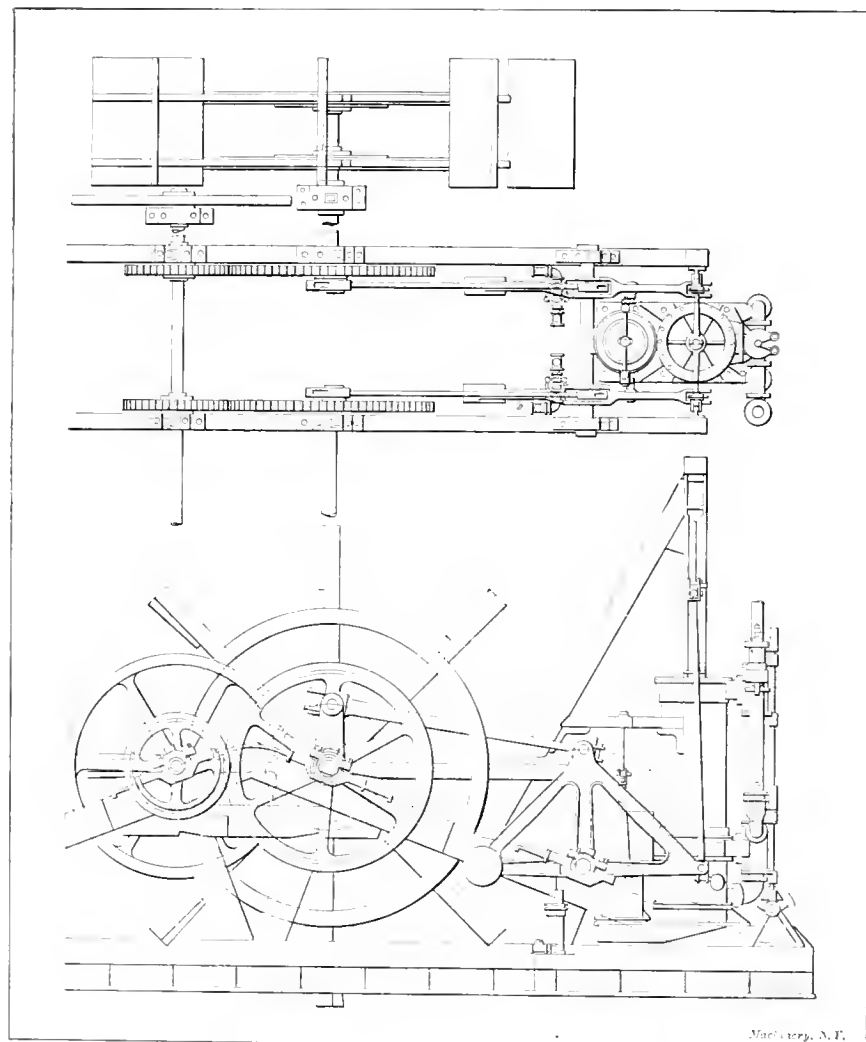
Plan and Elevation of the Engine which was built for the new *Clermont
